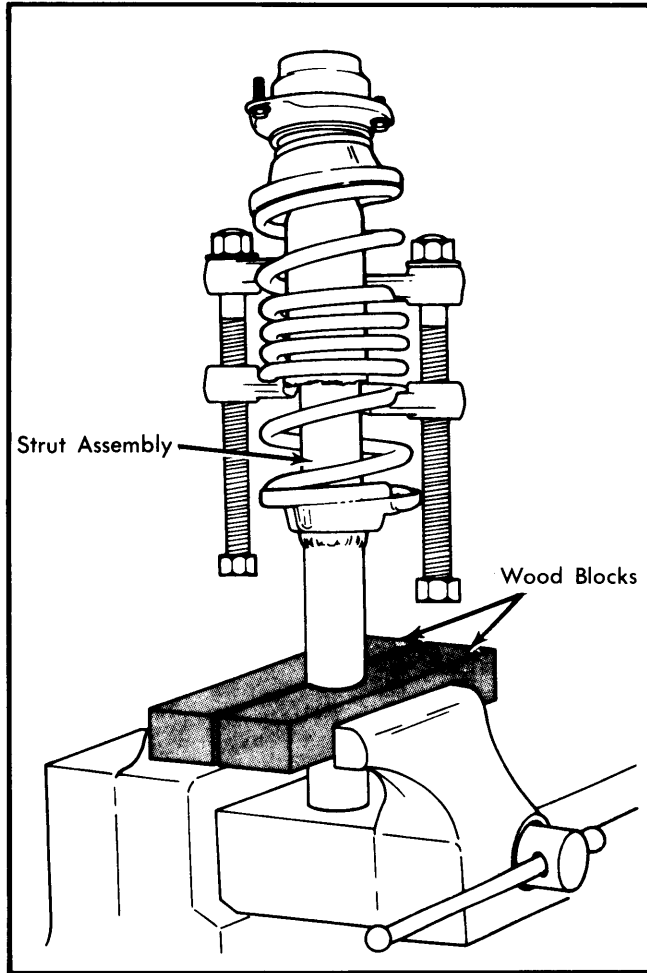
Positioning Strut Assembly and Wood Blocks in Vise
